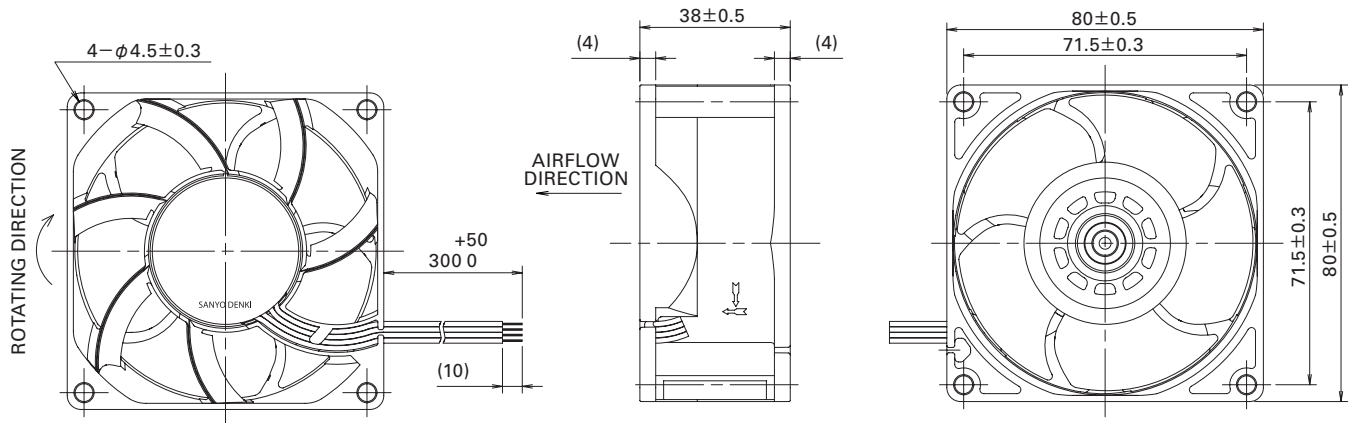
"San Ace 80" GA type dimensions, ribbed frame (unit: mm)
